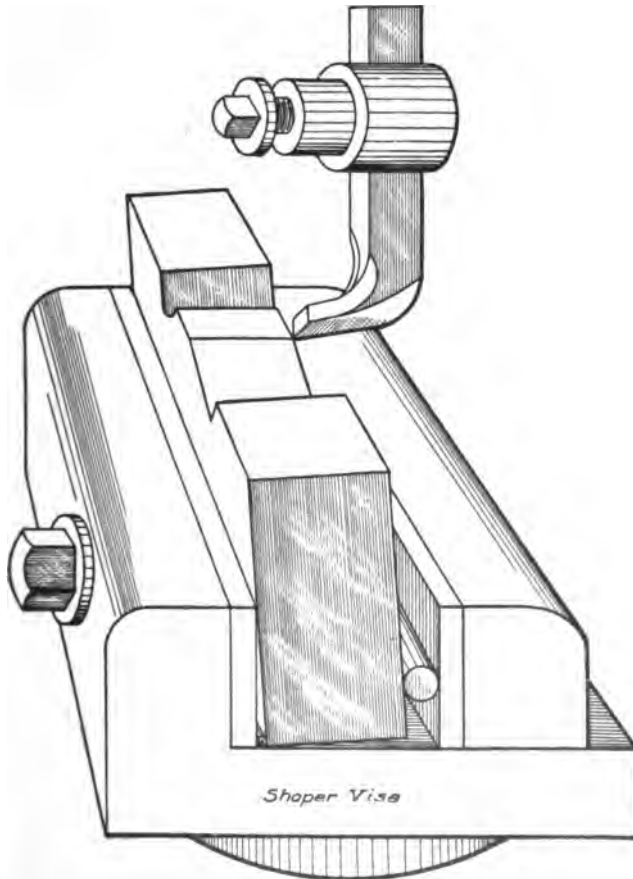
Shaping Die, Showing Method of Obtaining Clearance
